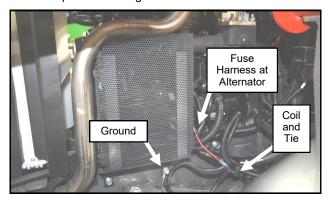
(Finish Wiring and Re-install Left Guard)
